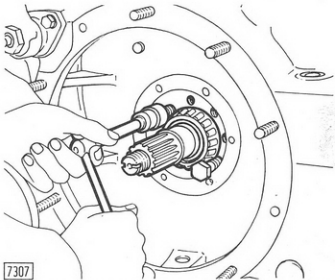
Removing the Bevel Drive and Bearing Inner Ring from Shaft, using a Pair of Puller Screws
